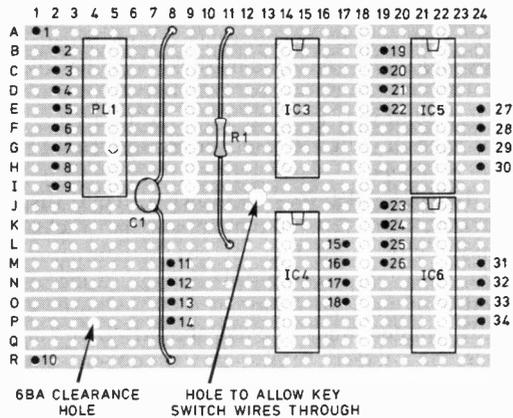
Component layout for Veroboard to be mounted inside the calculator case
